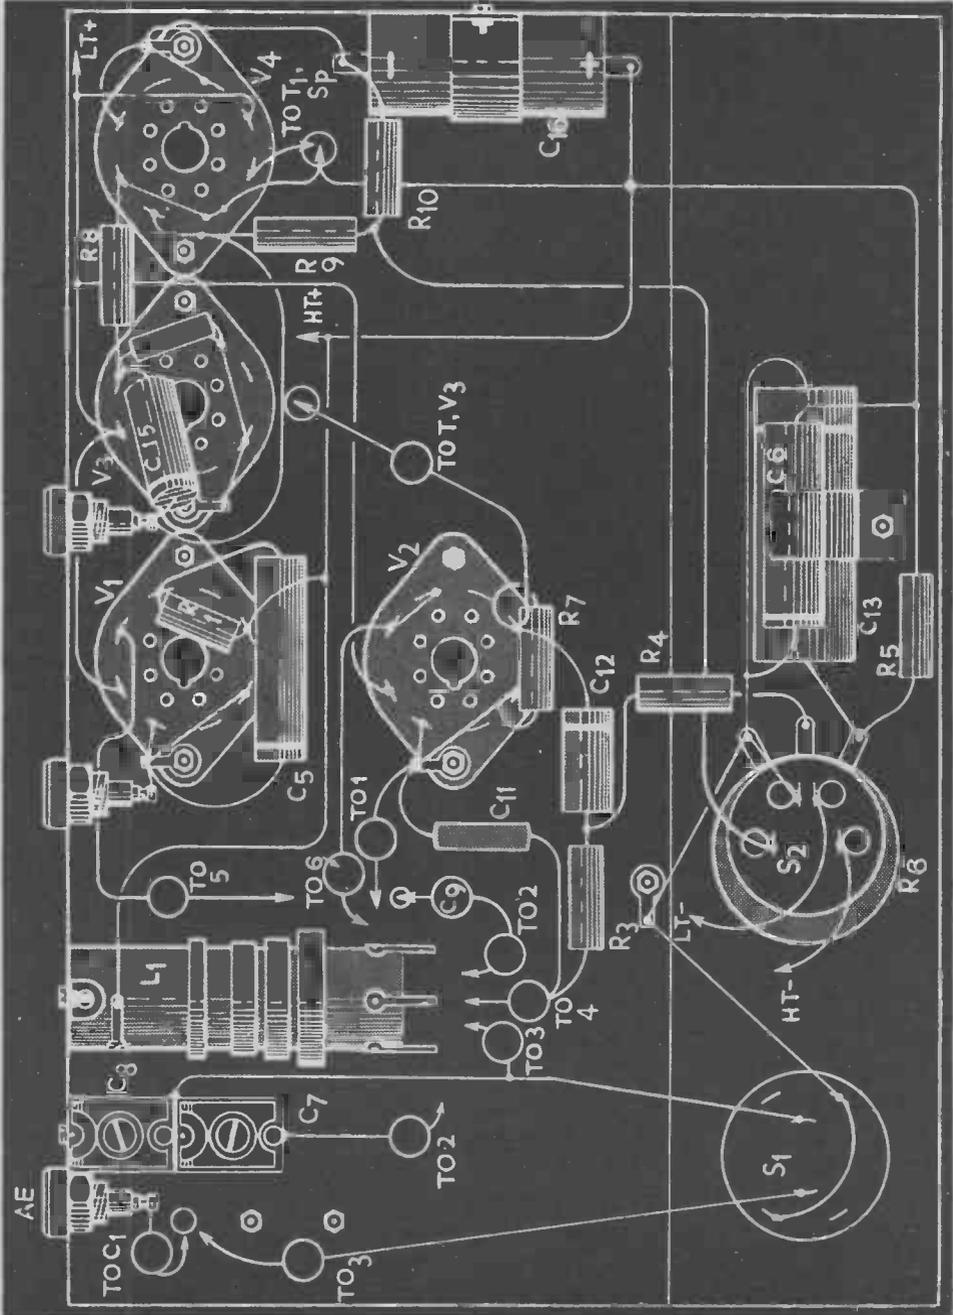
UNDER-CHASSIS VIEW OF THE FOUR-VALVE RECEIVER
